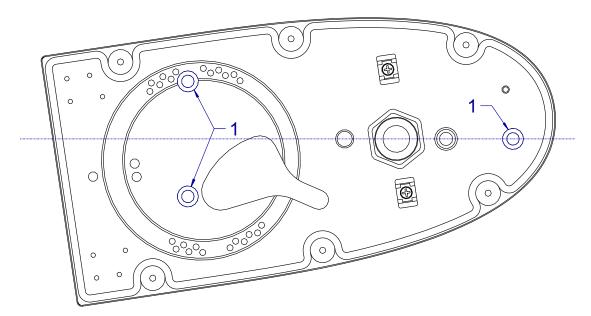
Example of mounting orientation, apertures and sealing spots, right camera cover
